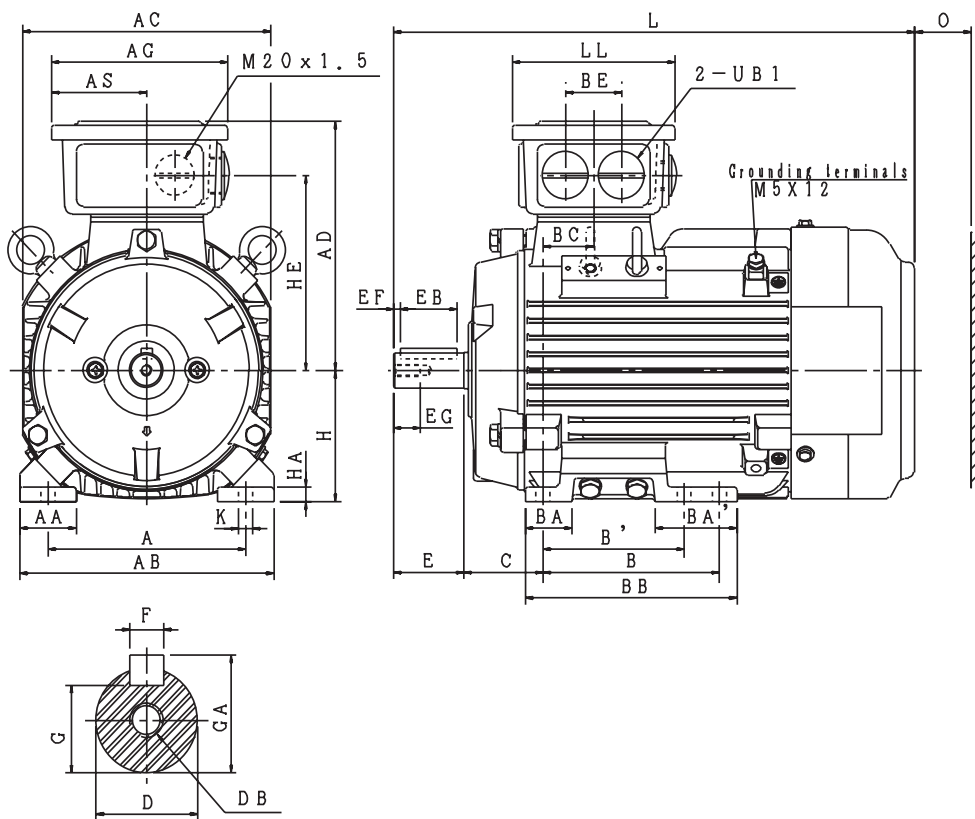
Outline drawing of cast iron design, feet version, mounting B3; frame size 80M – 112M
